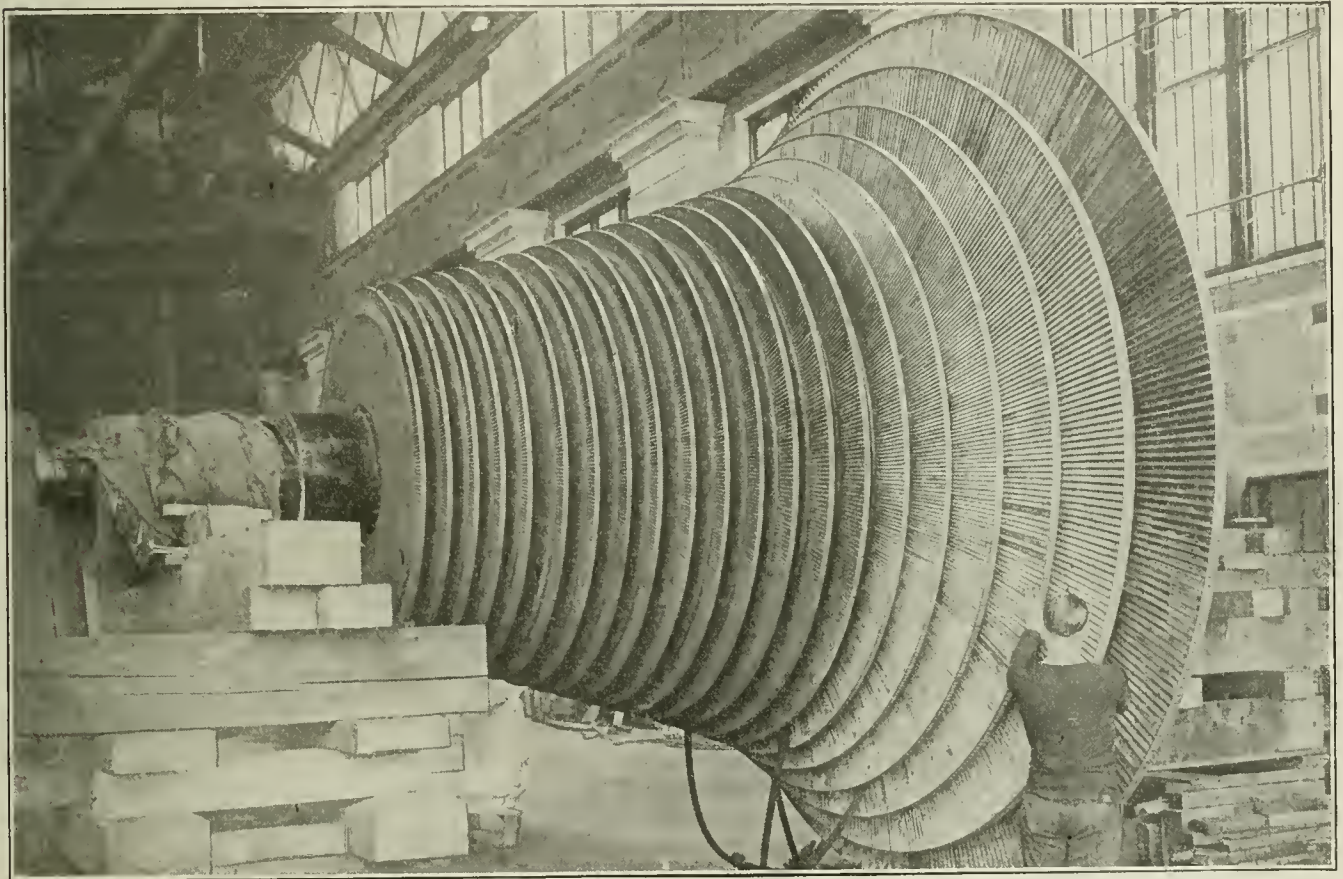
ROTOR OF THE TURBINE THE CASING OF WHICH IS SHOWN IN FIG. 1
